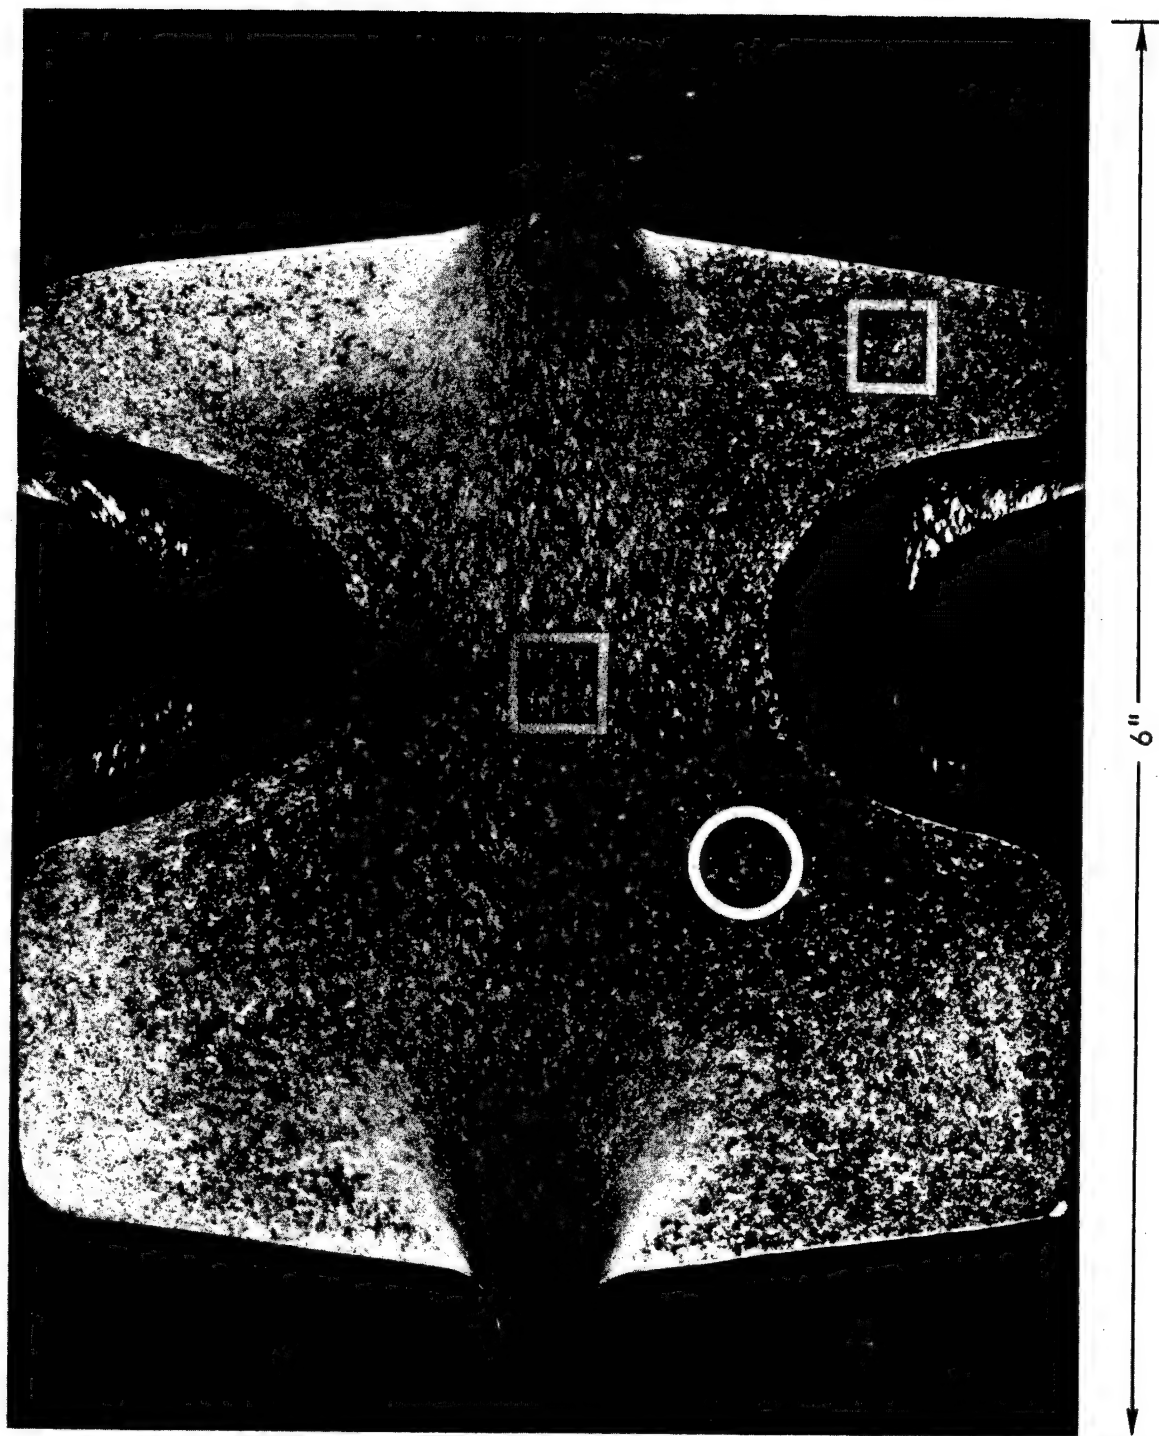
SECTION CUT THROUGH HEAVY ( ADJACENT TO ) CENTER PORTION OF FORGING
